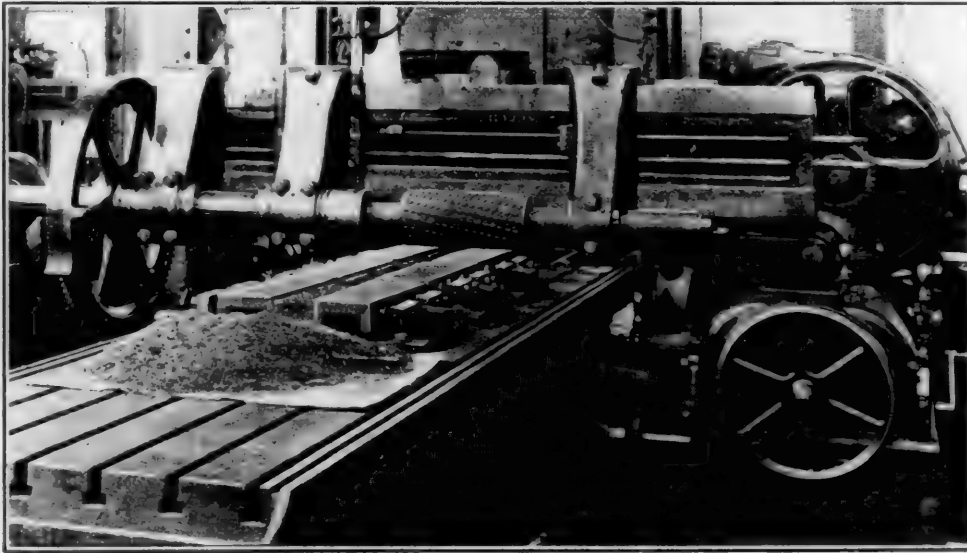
MILLING DRIVING BOX FACE OF SHOES AND WEDGES.
